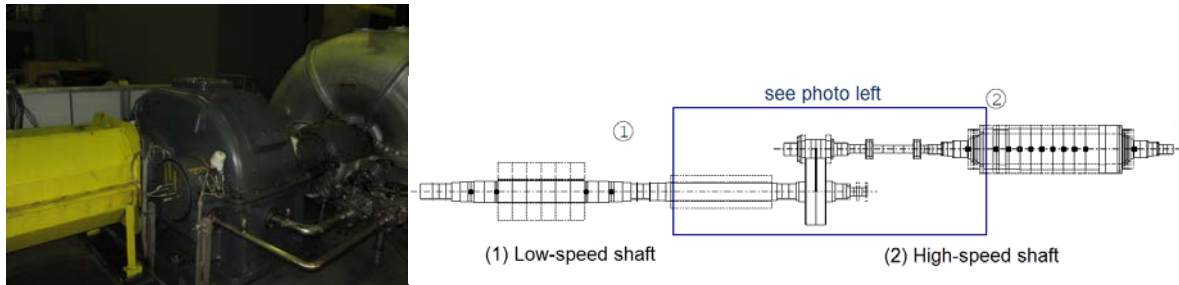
Coupling spacer, gear and compressor of drive system as per Table 17
